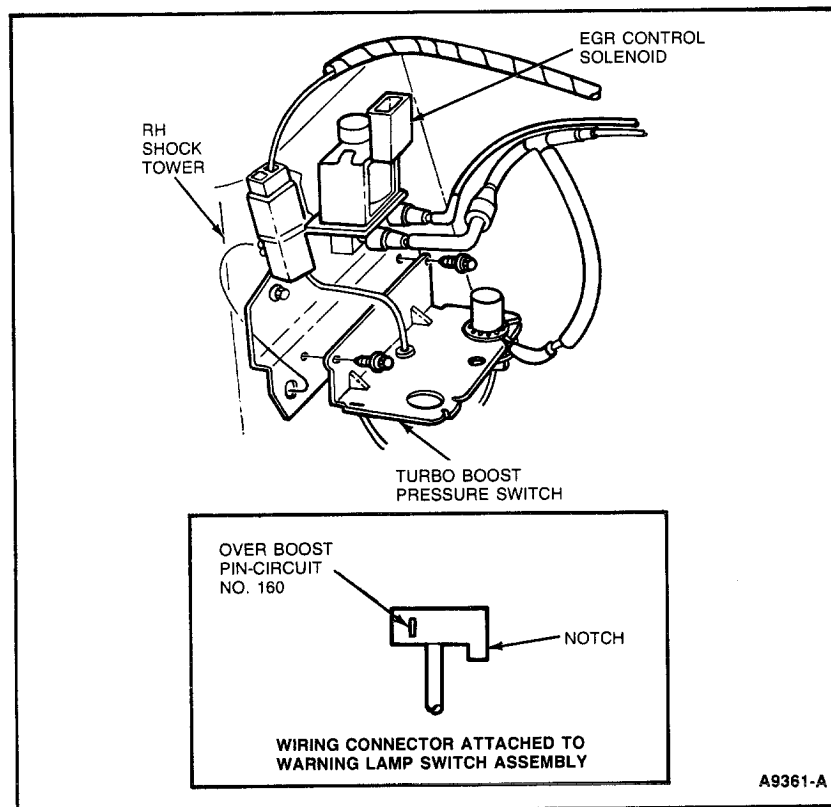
Manifold Pressure Warning Indicator Switch Assembly
